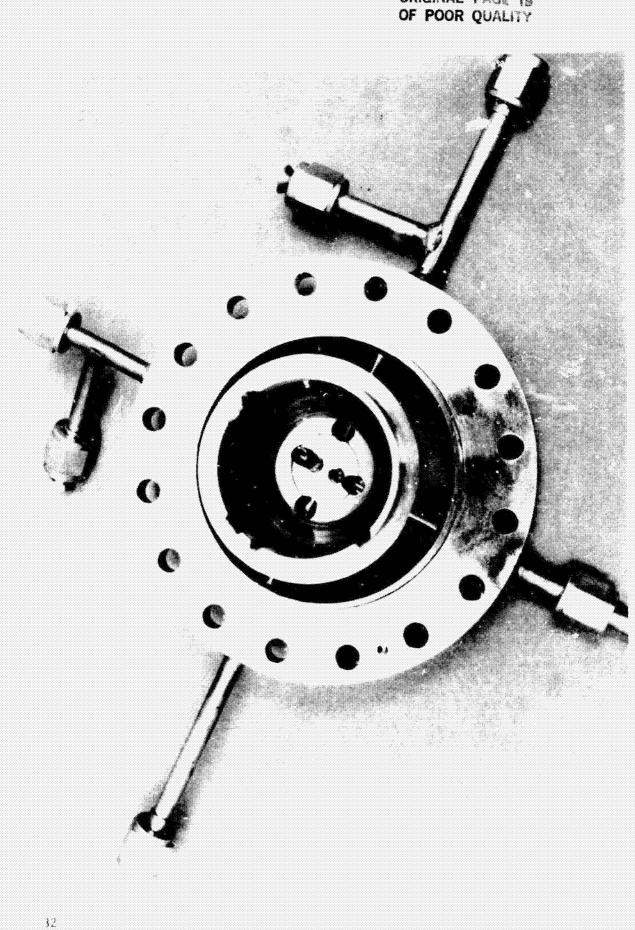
Pump Inlet Housing with Eight Bearing Supply Tapoff Holes
